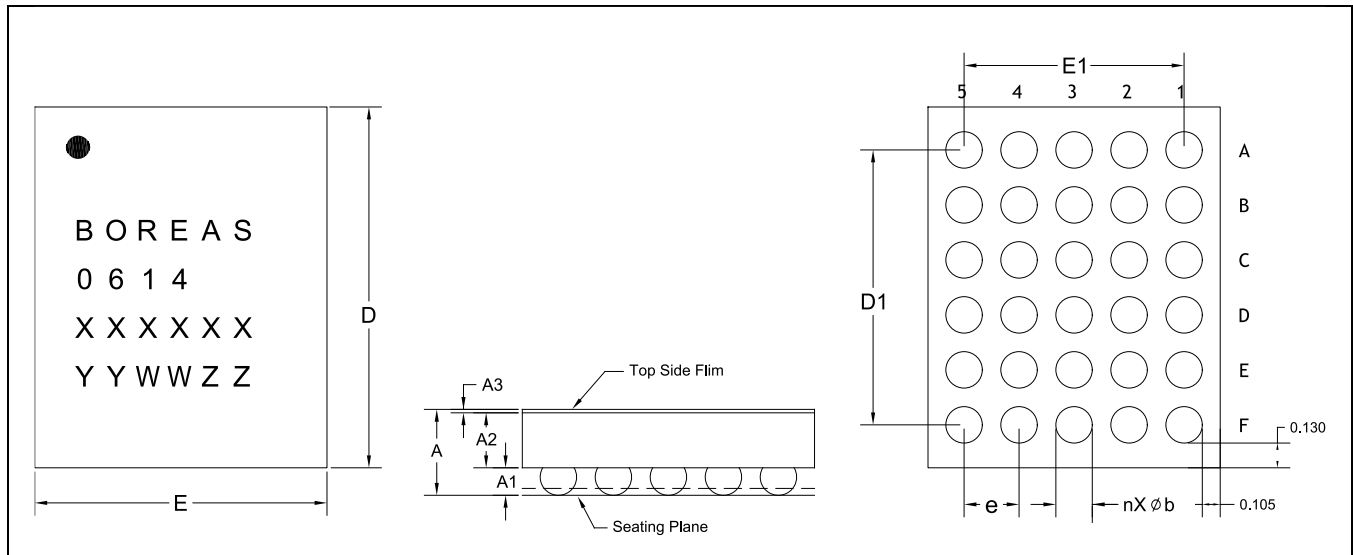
WLCSP 30B 2.1mm x 2.5mm package outline drawing with top, side and bottom view
